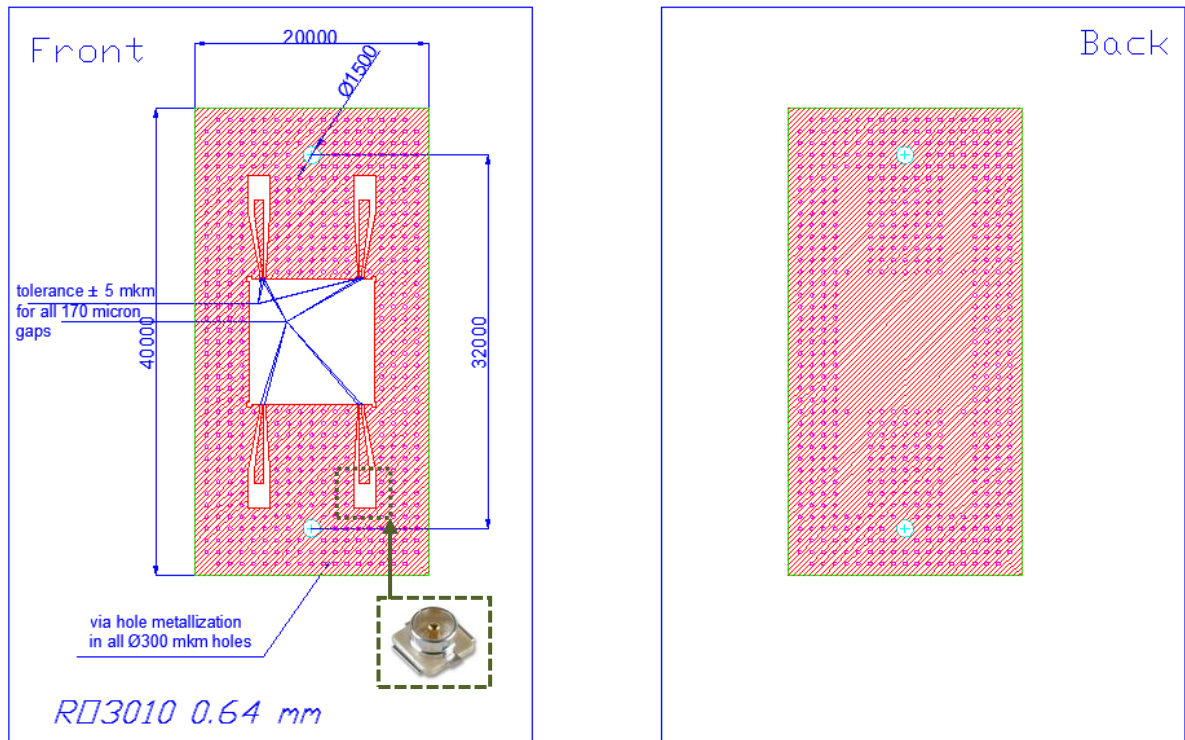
Design of PCB, in micron. The inset shows a 3D image of U.FL-R-SMT (01) - Receptacles
